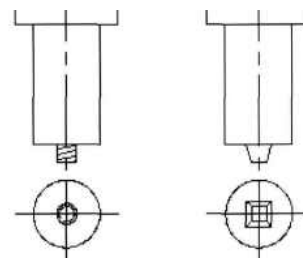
Typical weld tool and process parameters used in the FSW process
